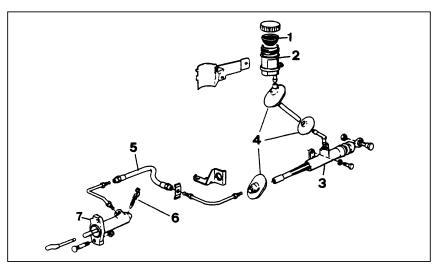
Hydraulic clutch actuating system: 1 Cap and filter of the fluid reservoir (2) - 3 Master cylinder - 4 Bulkhead covers - 5 Hose connection - 6 Bleed screw - 7 Slave cylinder.
